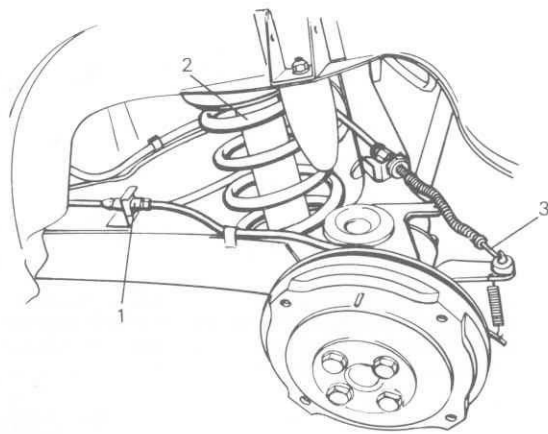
2 View of rear suspension with wheel removed. Brake fluid hose connection is 1, the coil spring is 2 and the handbrake link is 3
